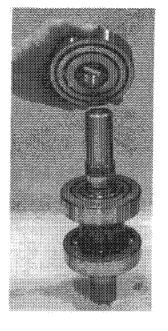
S Frame Stub Shaft showing sequence of mounting bearings.
